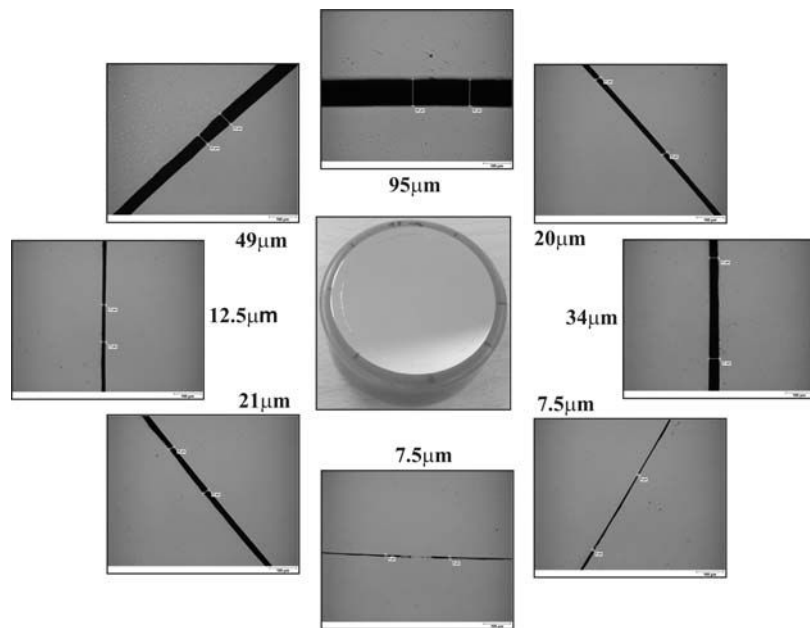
Contact zone between tube (outside) and aluminum mandrel (inner side) in a cut perpendicular to test tube axis.
